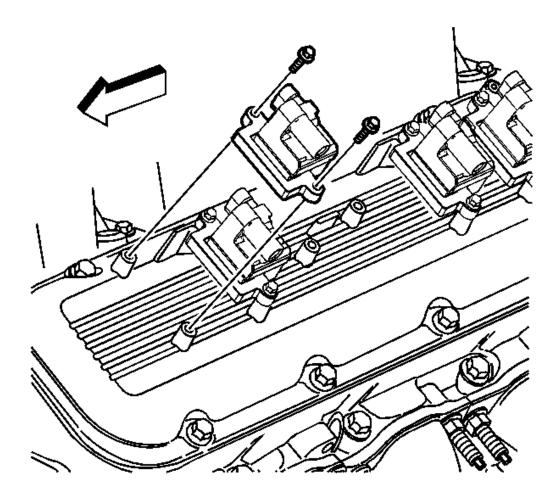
View Of Ignition Coils & Bolts Courtesy of GENERAL MOTORS CORP.
